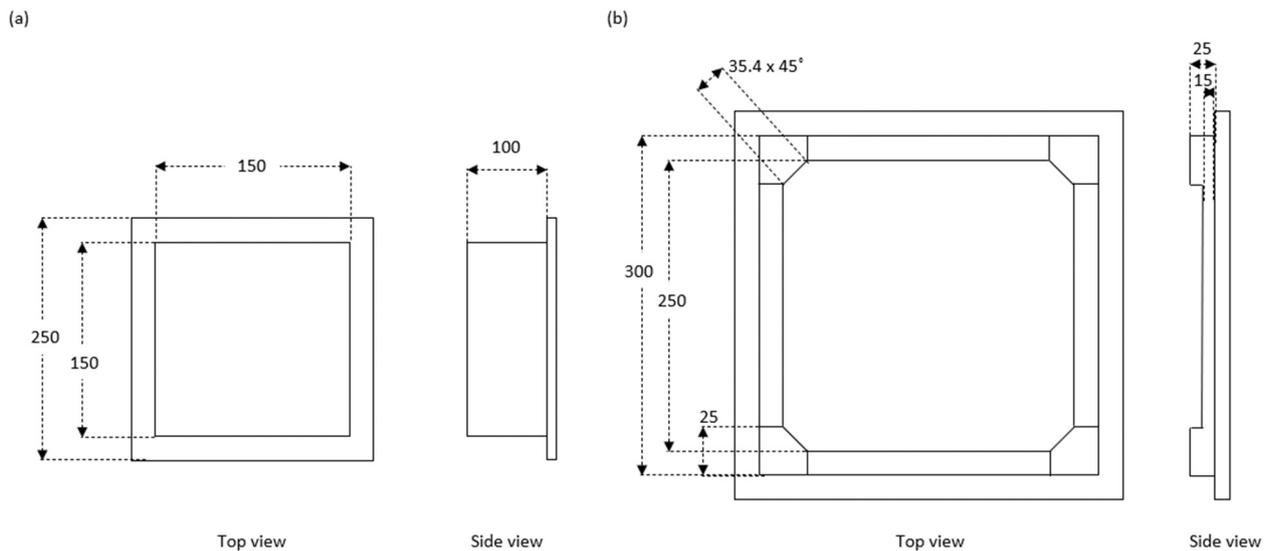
Schematic diagrams of two geometries used to scale-up ultrasonic assisted additive manufacturing, dimensions are in mm (a) basic block shape structure (b) scaled 3m³ waste canister flange.
